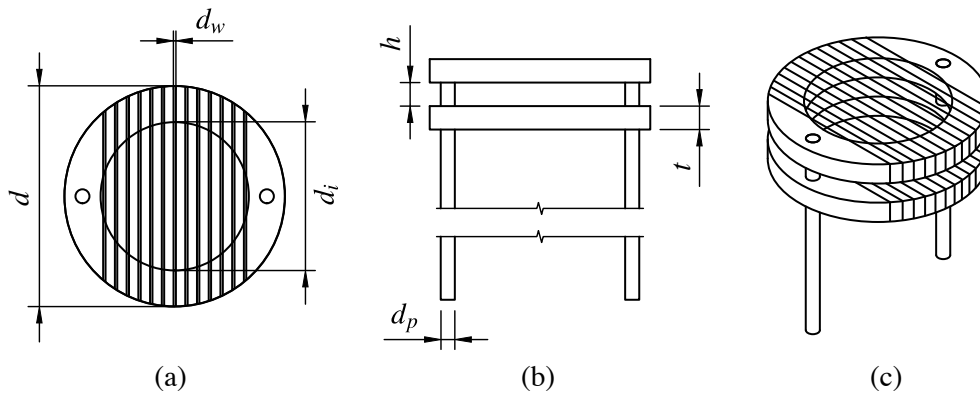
(a) Top view, (b) side view, and (c) isometric view of the heater, which consists of two identical concentric annular ceramic plates, each wound with nichrome wire. It is held in place by two threaded support prongs (shown). The dimensions are $d = 47$ mm, $d_i = 31.6$ mm, $d_w = 0.6$ mm, $t = 5$ mm, $h = 5$ mm, $d_p = 3$ mm. The power is supplied to the nichrome wire by two fabric-insulated copper wires (not shown), which each have diameter mm.
